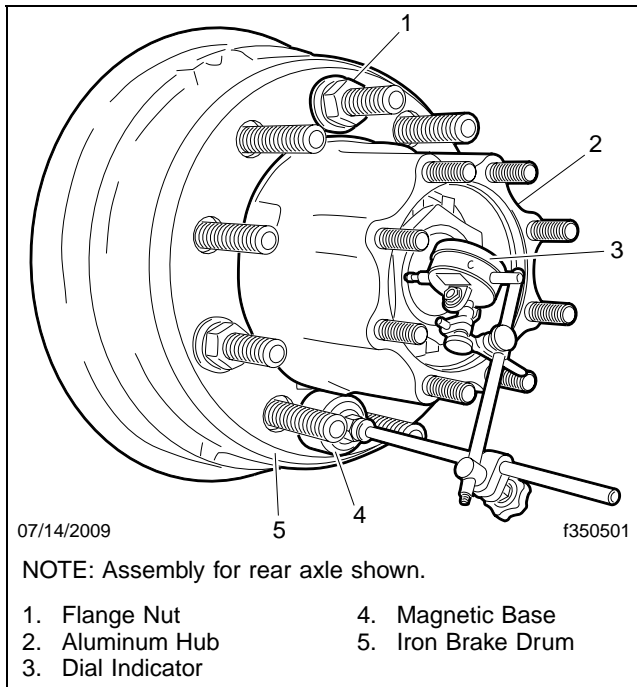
, Dial Indicator Setup, Aluminum Hub with Iron Brake Drum (rear hub shown)
